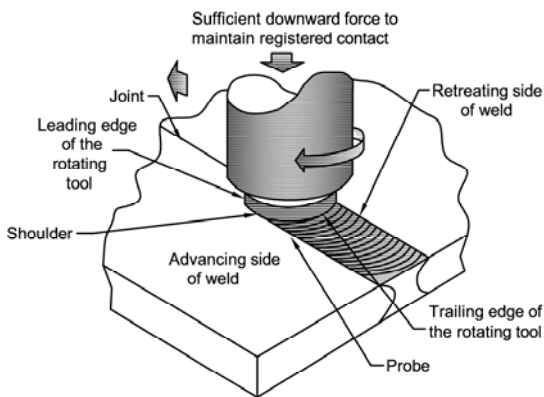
Friction stir processing (FSP), a solid-state technique for joining materials and a tool for material processing (*i.e.*, surface machining) [31]
